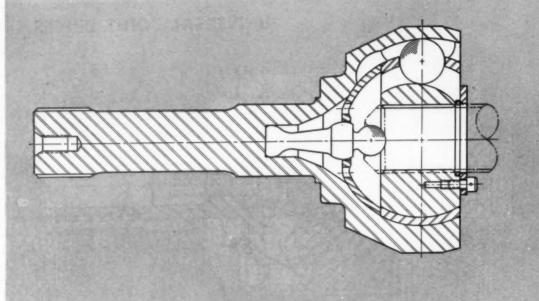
Old style joint with pilot pin for locating cage at low angles
